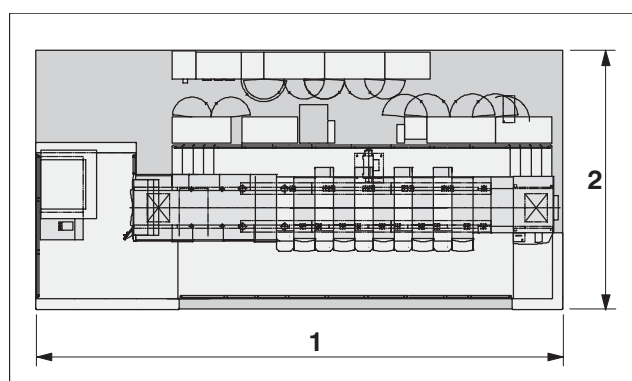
Floor space required by the printing press with DryStar UV in elevated installation
